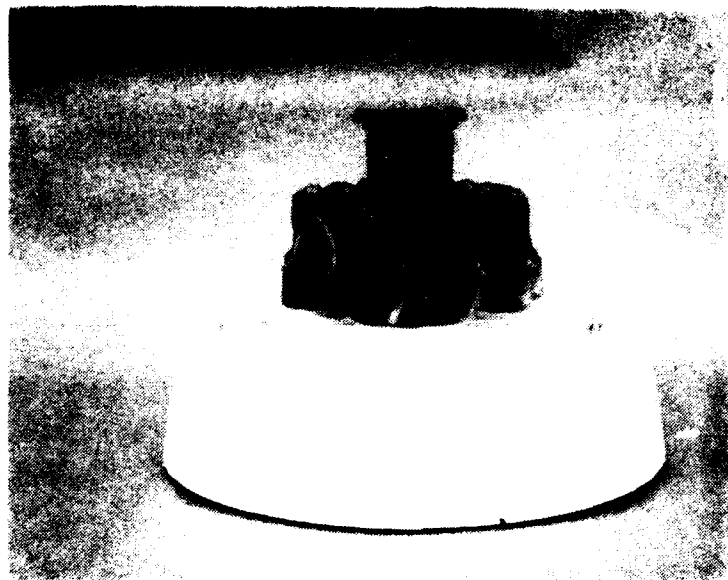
Revised TACOM Wax Shell Mounted on Plaster Mold
